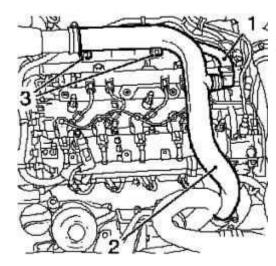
Removing the inlet pipe and ventilation hose Engine: 1 - ventilation hose Engine, 2 - inlet pipe, 3 - bolts fastening
